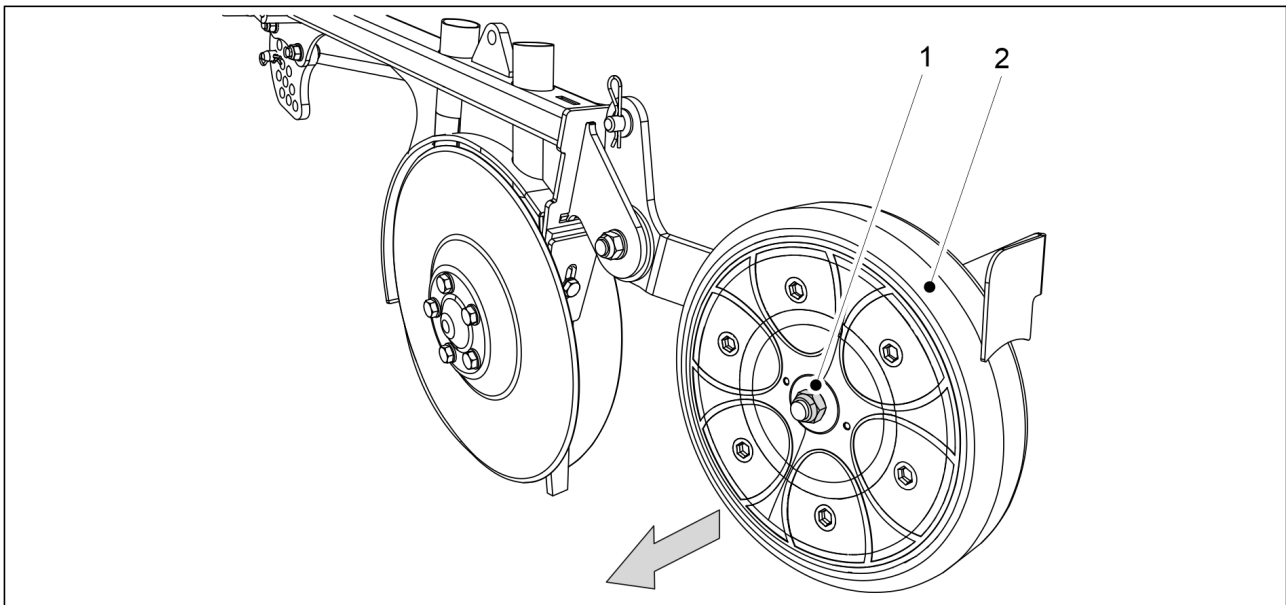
310. Demounting the covering wheel
